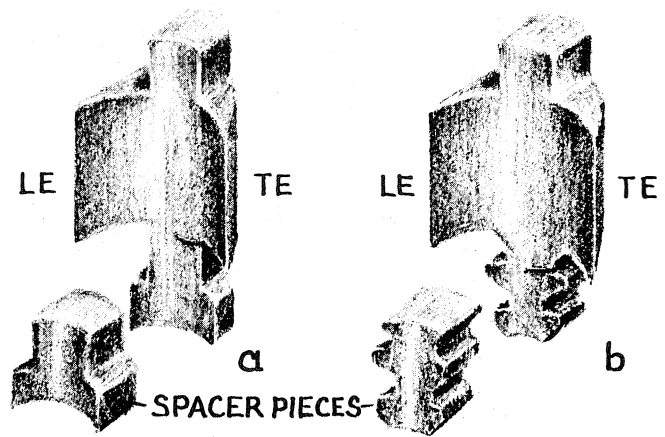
Drawn Profile Blades with Spacer Pieces a) T-root, b) Serrated Root.
